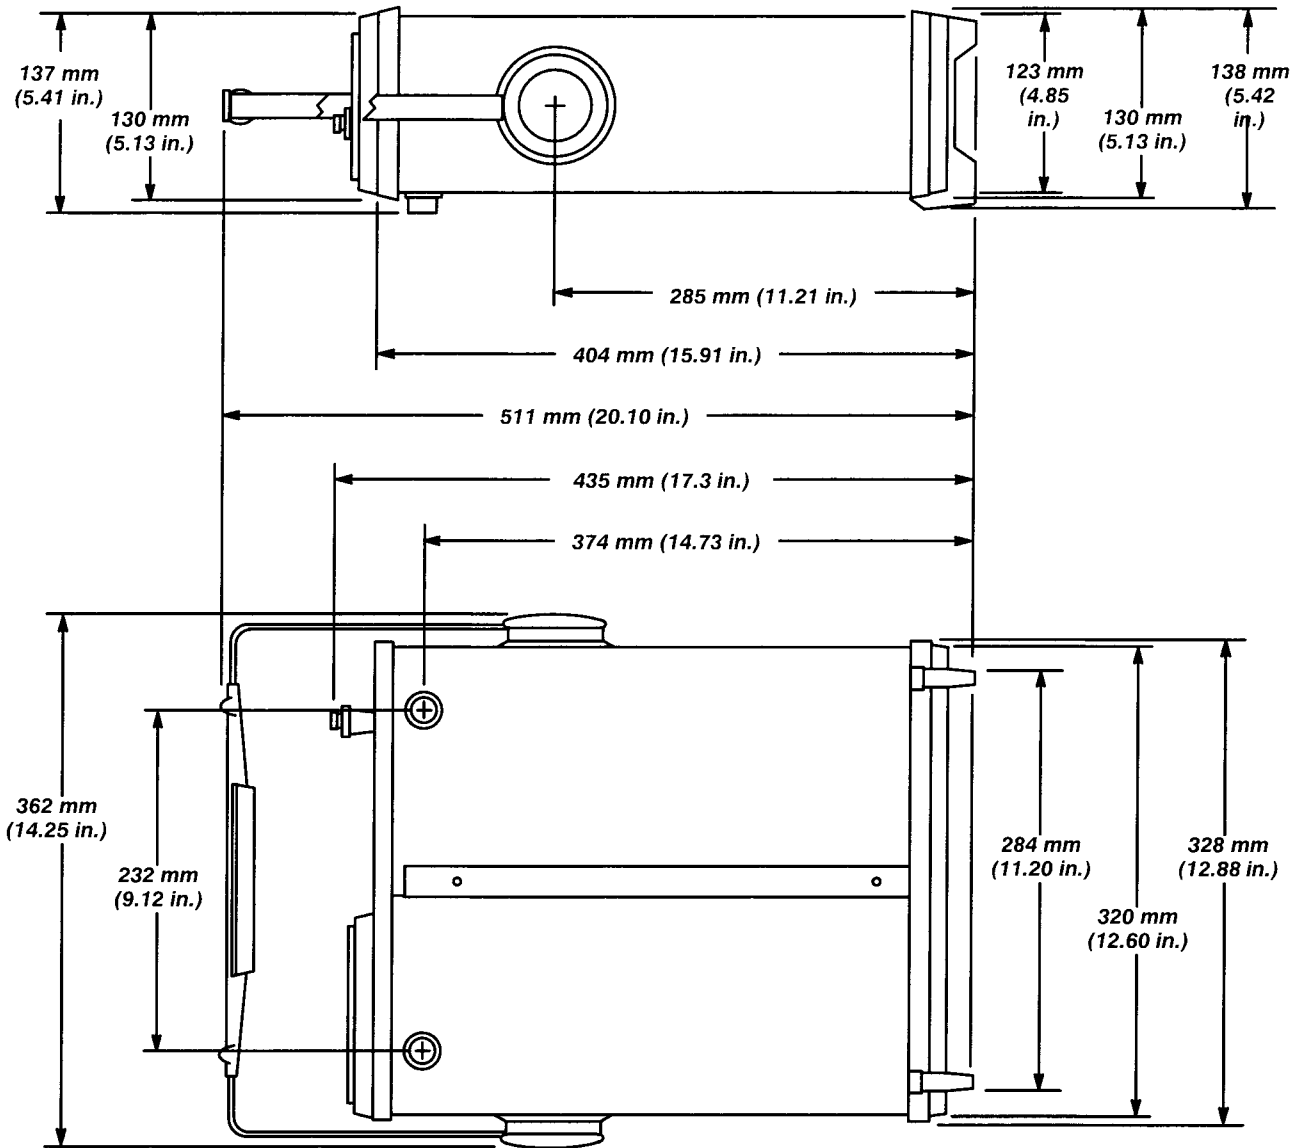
Physical dimensions of the 2221A Digital Storage Oscilloscope
